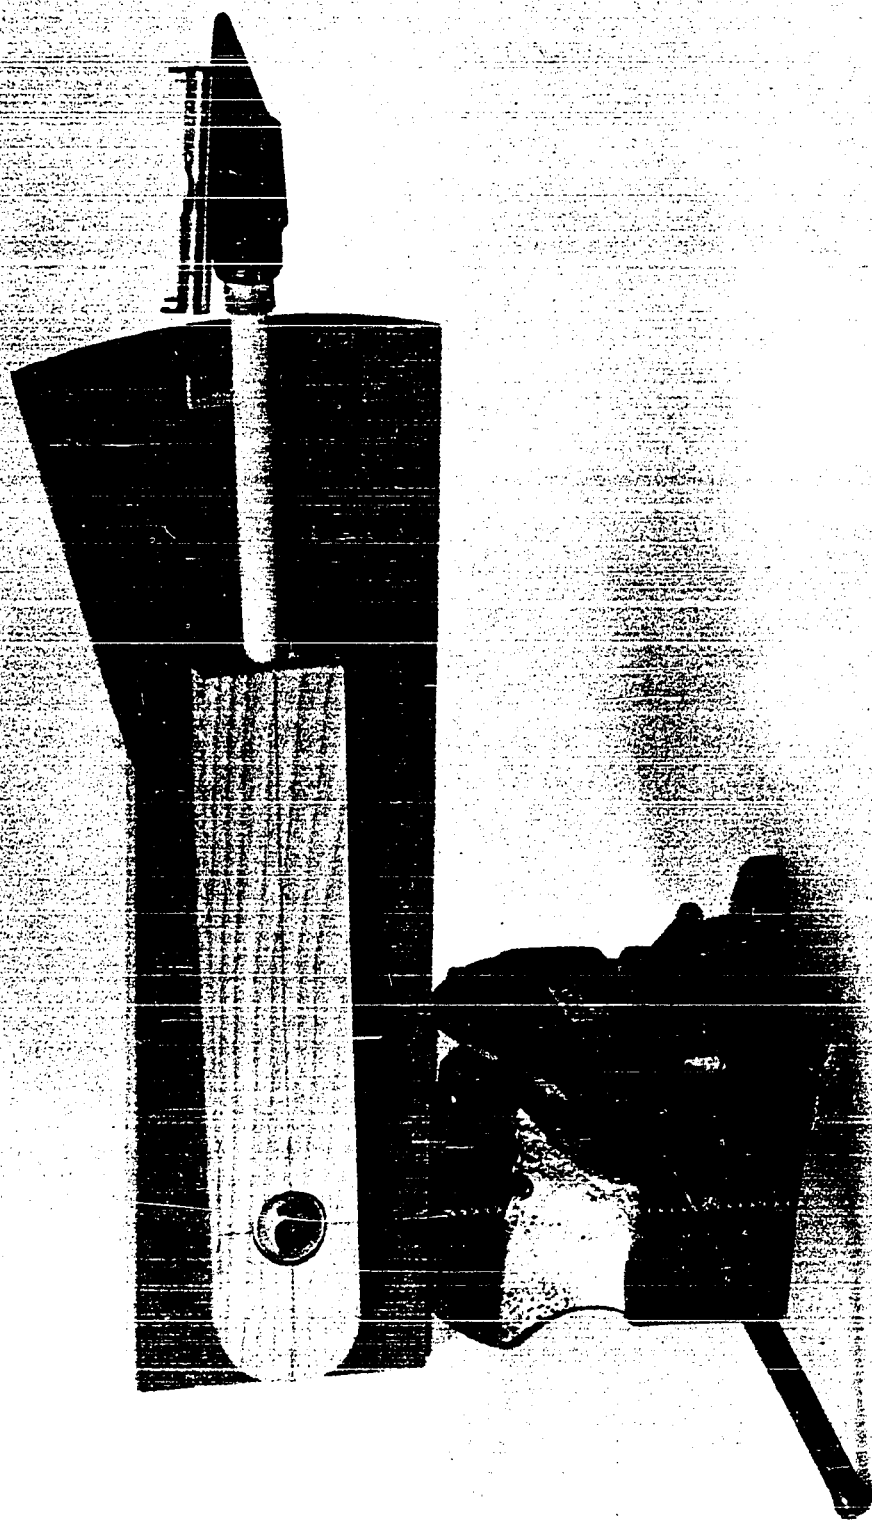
Tool for Measurement of Bore-to-table Angle.
